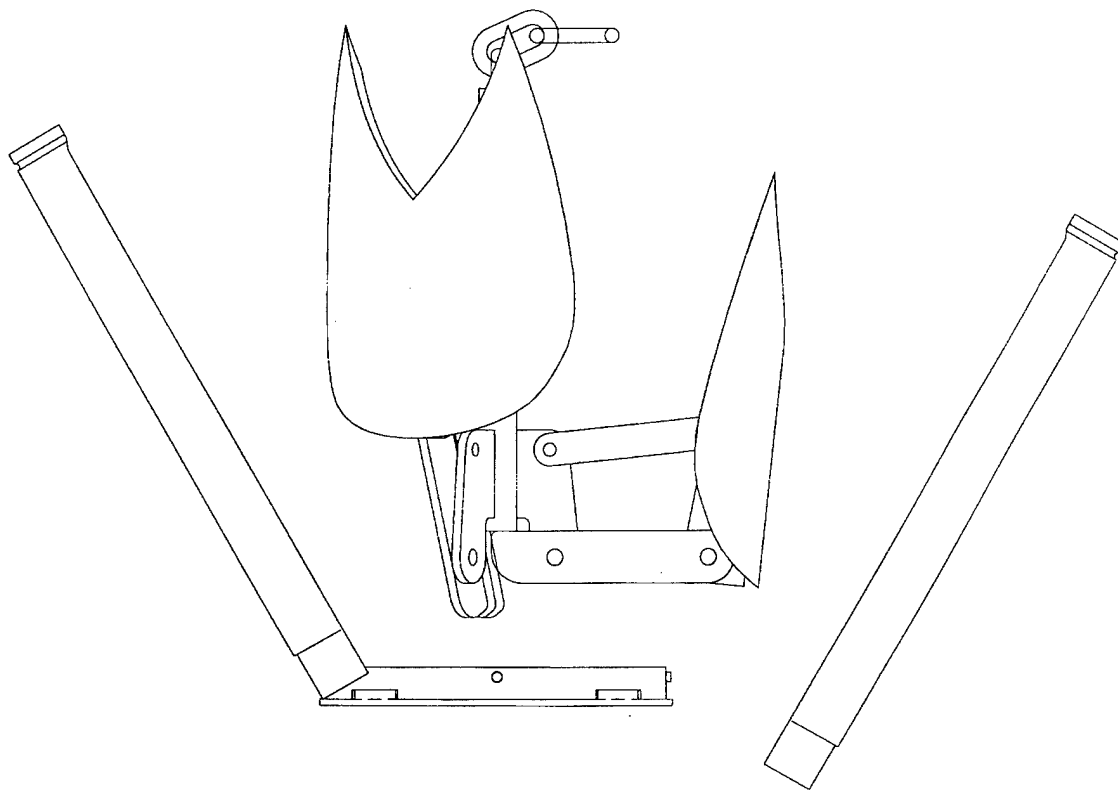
Anchor with breakaway canister (two sides shown falling away)
